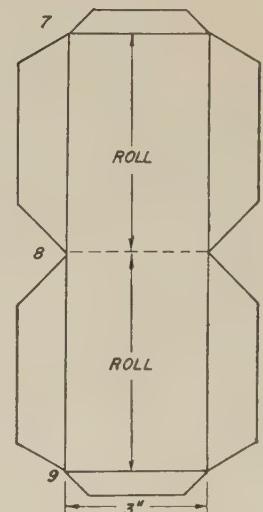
shows a perspective view of the fitting. Layout the cheek pattern first as shown in Figure 2. The throat radii are laid out in the same manner as was explained in Problem 7, with the throat arcs being described from 1 and 4. The heel arc is obtained by setting the compass equal to the distance from 1-9 describing arcs 8-9 and 7-8 using points 1-4 as centers.
